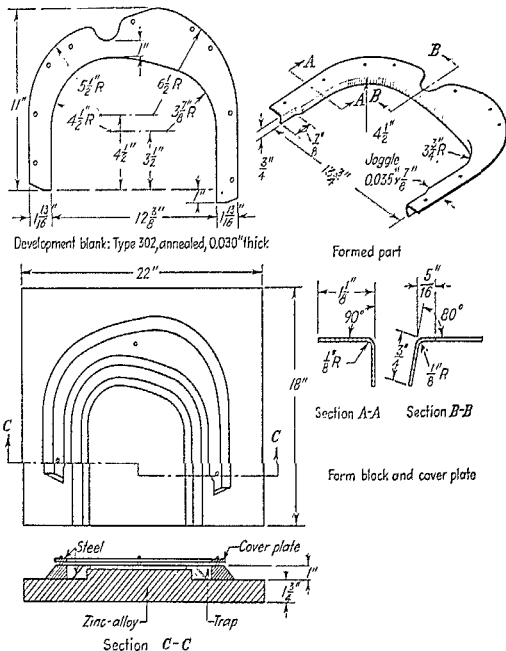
Stainless-steel part with stretch flange.⁵
